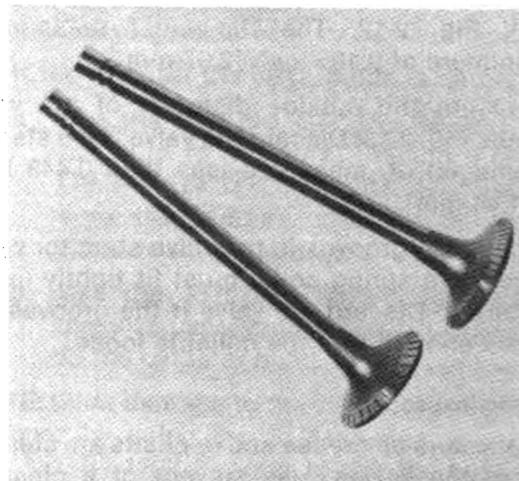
(N20217). Put Marks On The Valve Face.
